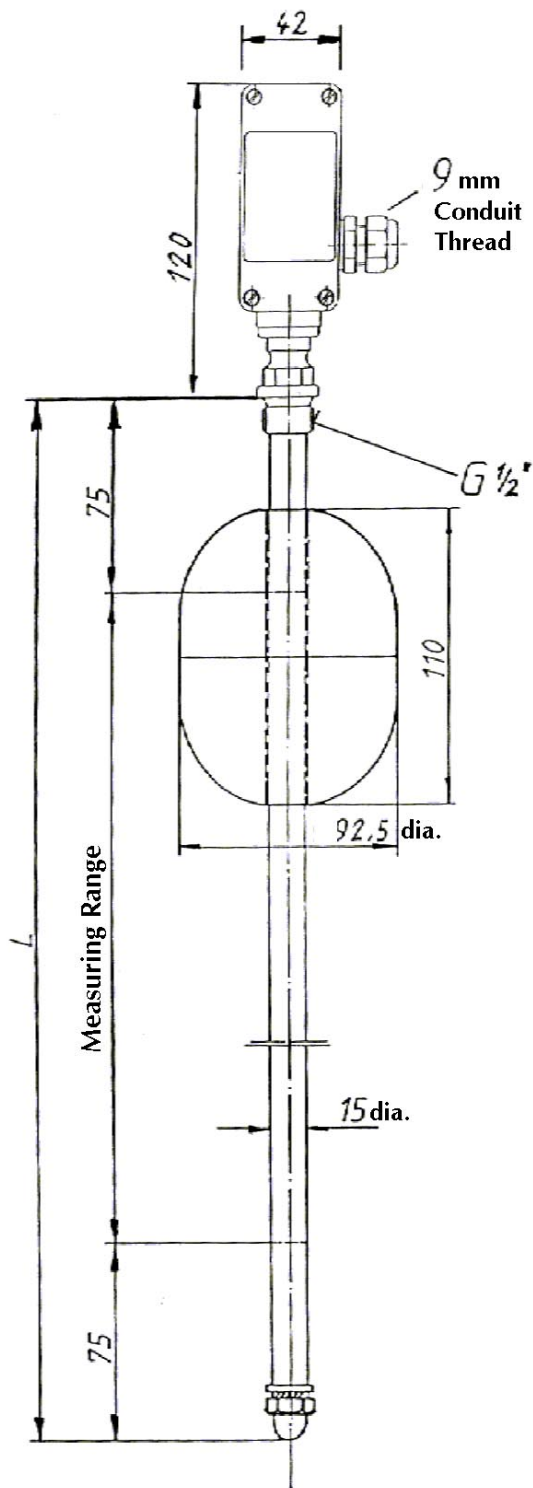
Dimensional Drawing for NIVOMAT® FS 21/22-V-G-V9-P Fill Level Sensor (stainless steel)
